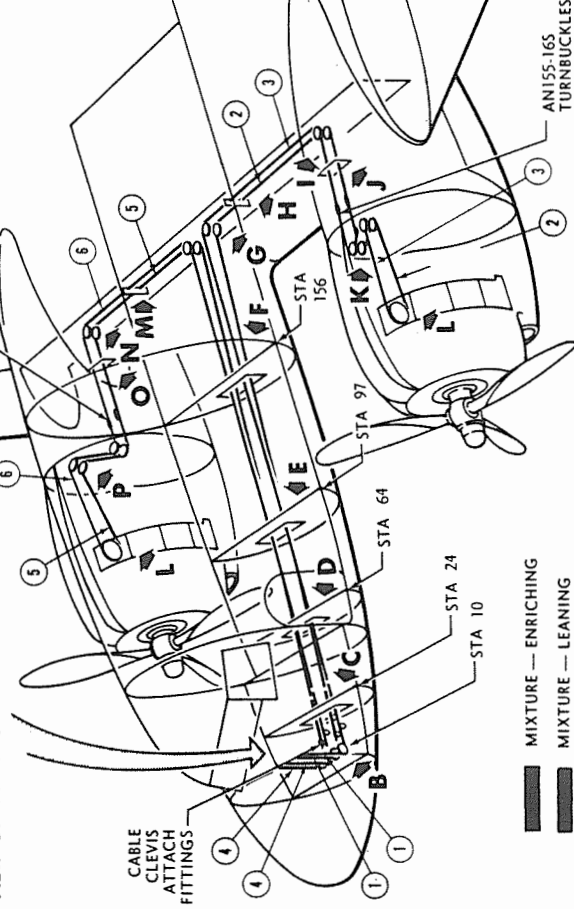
(Sheet 8 of 8 Sheets). Throttle Control System – Cable Assemblies
